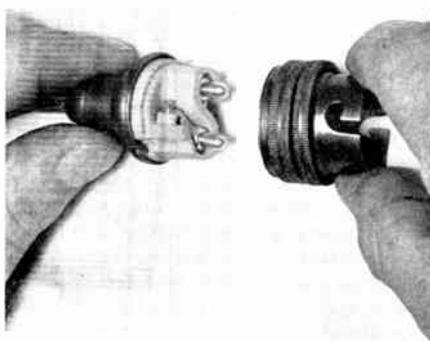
ASSEMBLING THE LAMP-HOLDER.
